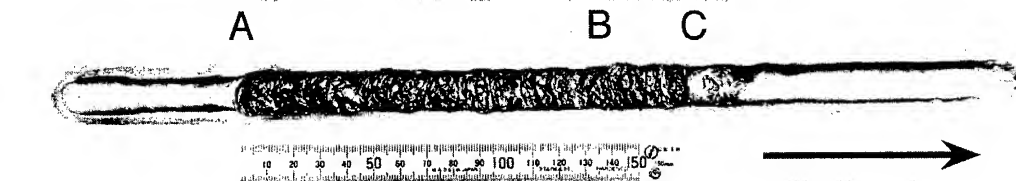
Appearance of puckered bead in conventional MIG welding and arrest of puckering by DW MIG welding process
